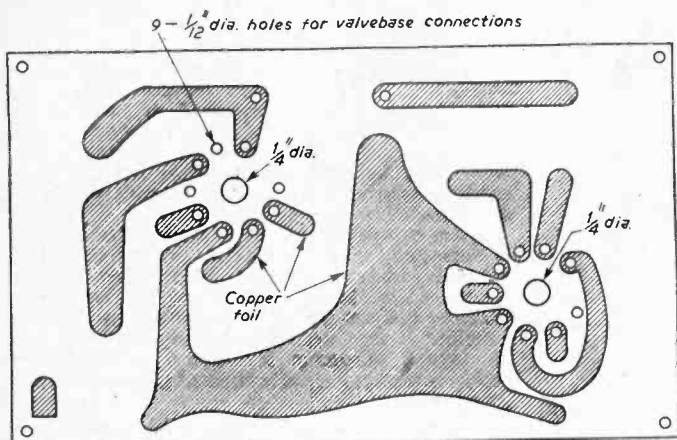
The printed wiring (the board is approximately 6 in. x 3 in.).
